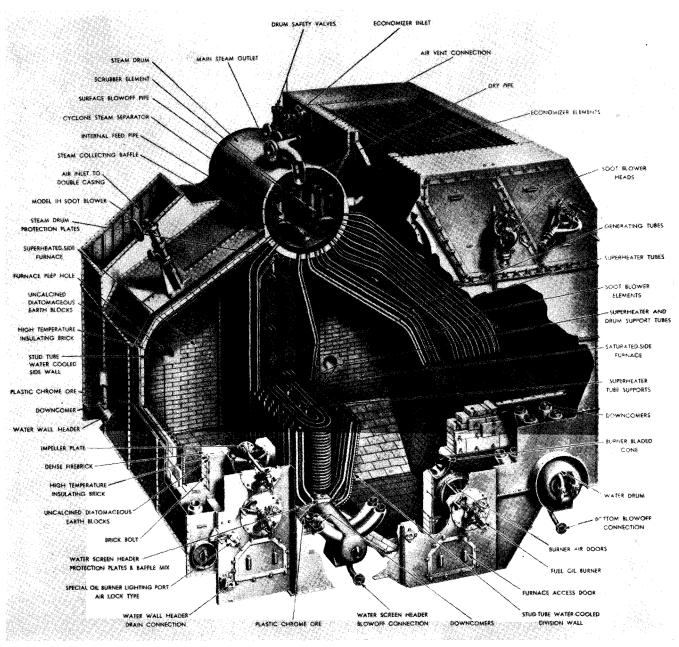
Babcock and Wilcox "M" Type Single-Uptake Controlled Superheat Marine Boiler "M" Type.
